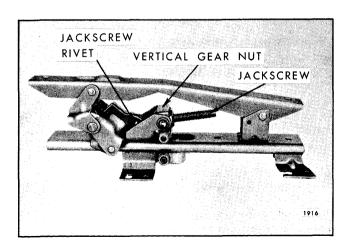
Four-Way Seat Adjuster - "A" Styles
